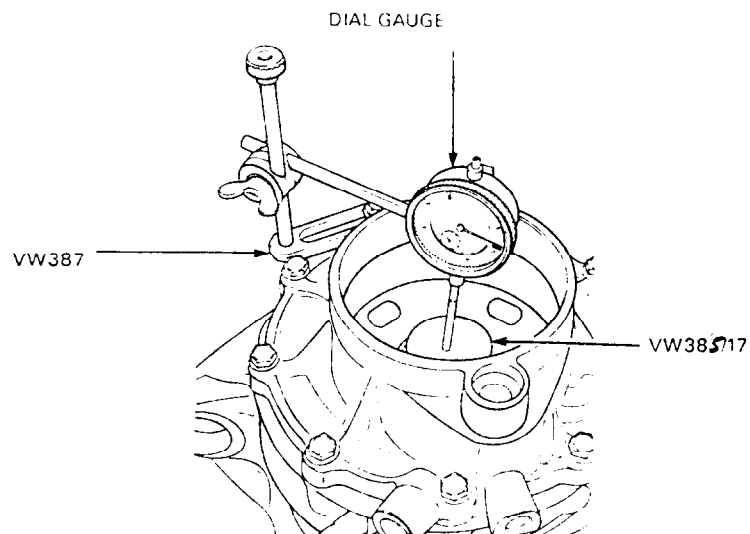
Installation of Pinion Shaft Inner Bearing
